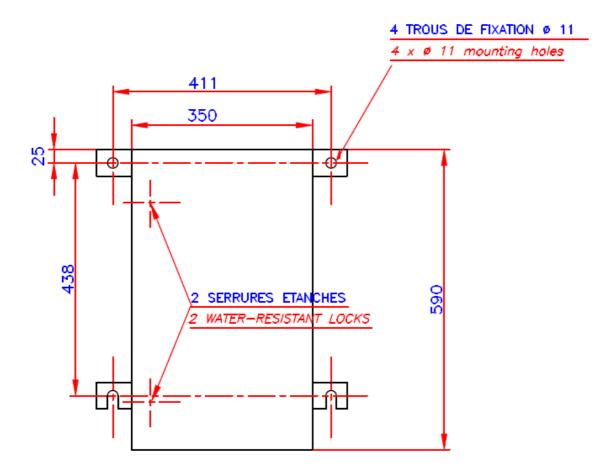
Outline and mouting dimensions Power supply P/N:113782RW-8E
